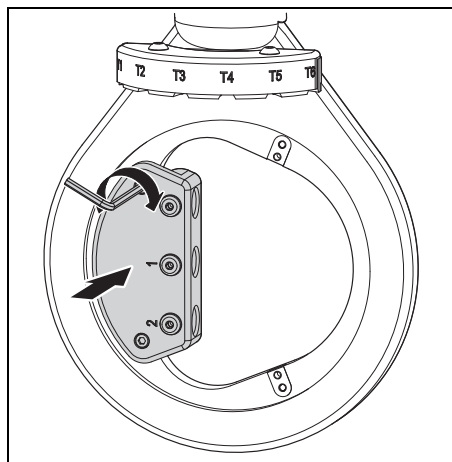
Ceramill Motion / Ceramill Motion 2 4X
